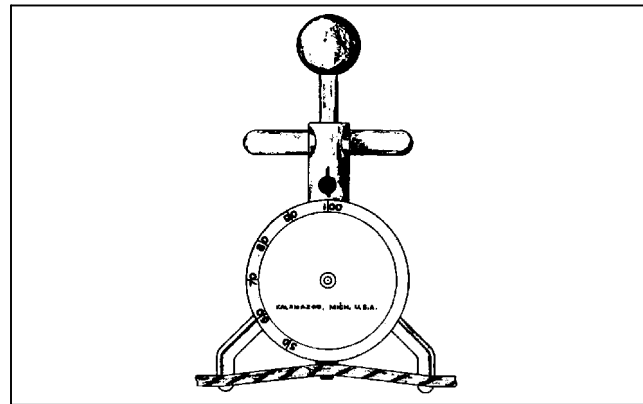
Belt Tension Gauge (Part No. 07-00203)
